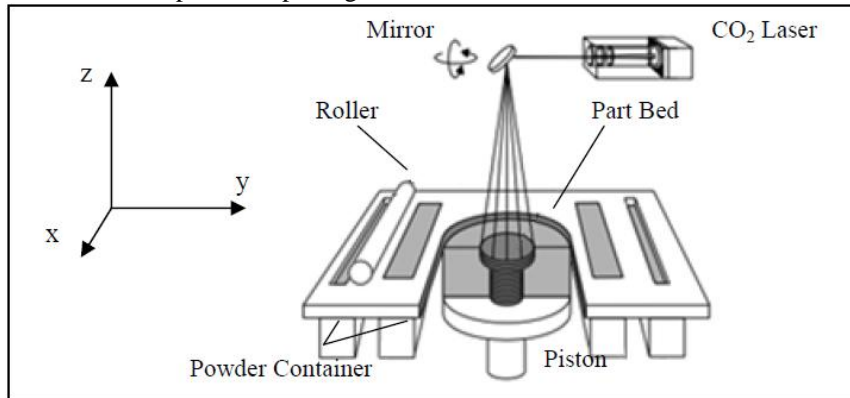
Layout of SLS machine (Source : Milwaukee School of Engineering)[1]
